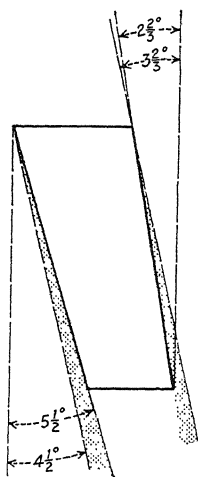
Showing the *theoretical* and the *clearance* angles for a  $1\frac{1}{4}$  in.—4 square thread.
